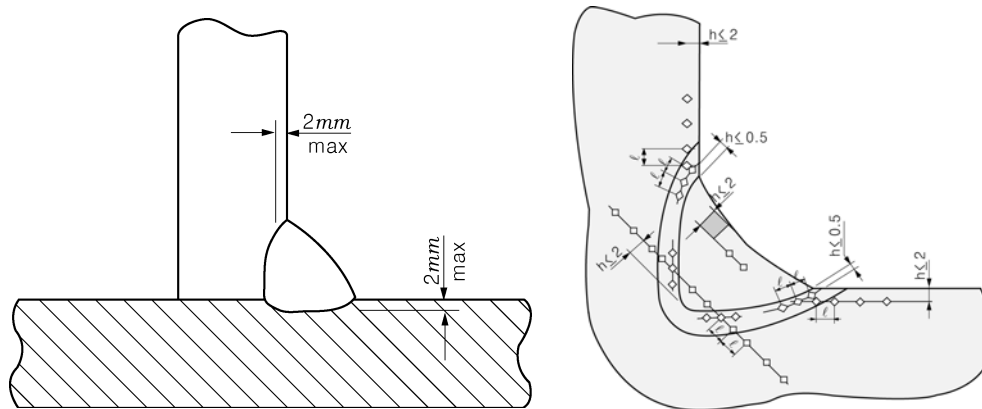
Hardness test for fillet welded joint (unit : mm)
